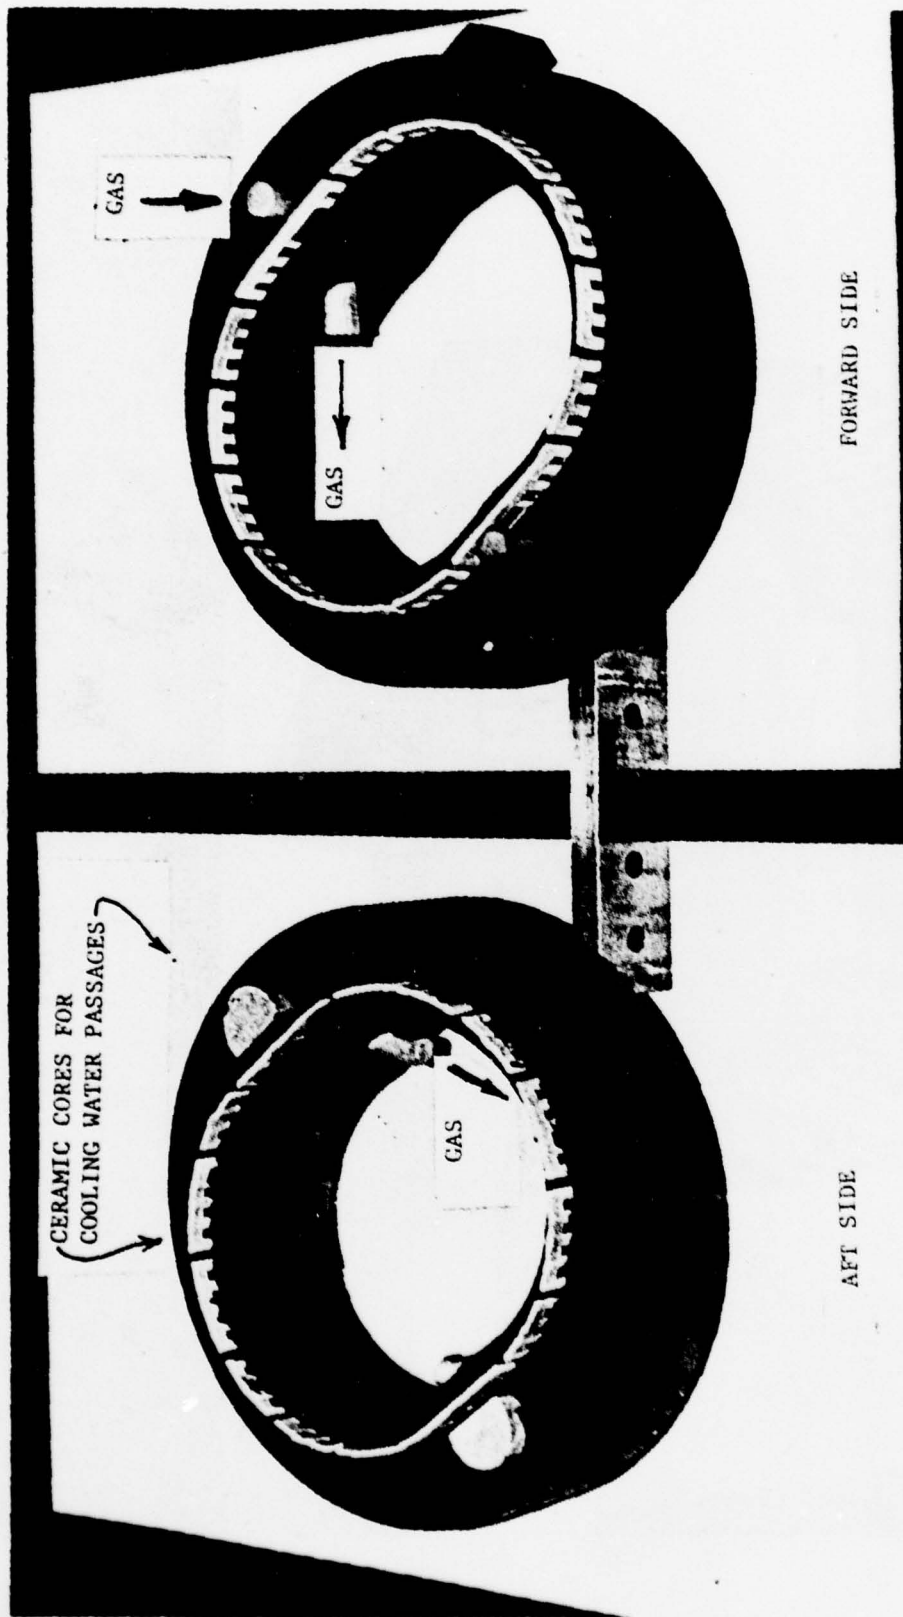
Forward and Aft Side Views of Completely Assembled Rotor Housing Waxes and Cores
